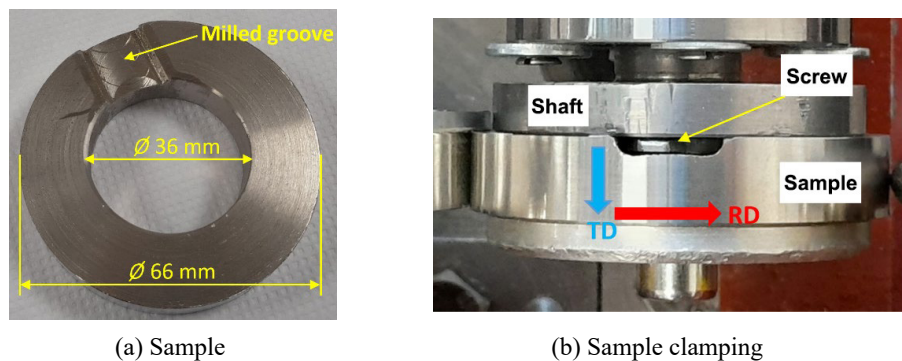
Sample with the milled groove and its clamping on the shaft.
